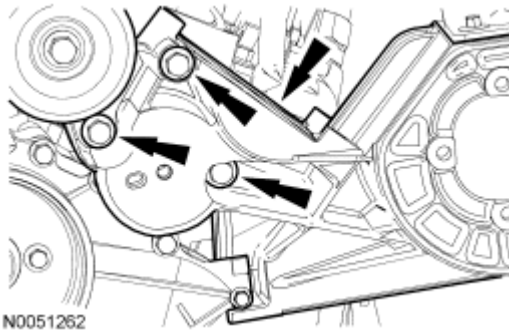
Locating Bolts & Front Of A/C Compressor Mounting Bracket
